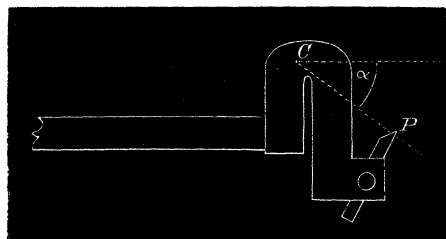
shows an excellent form of cutter-holder, designed by the late W. Froude, F.R.S., in which α is about 45° . Tools held by such a cutter-holder leave a very smooth surface on the substances
